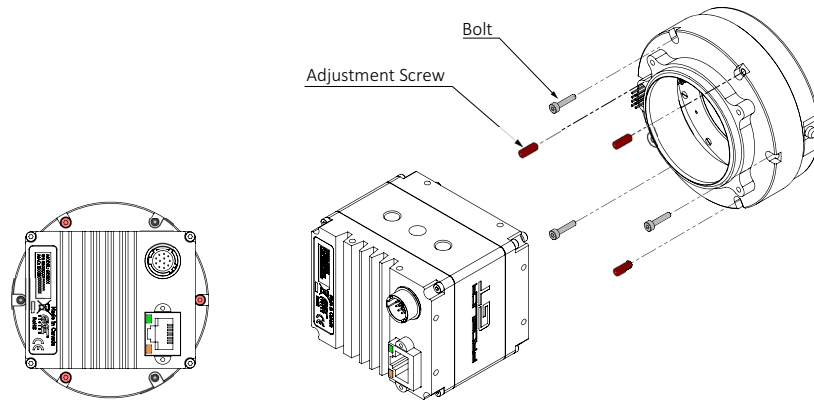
Back view (left) and exploded view (right) of Prosilica GT1930L camera assembly showing the adjustment screws and bolts in the EF-Mount
